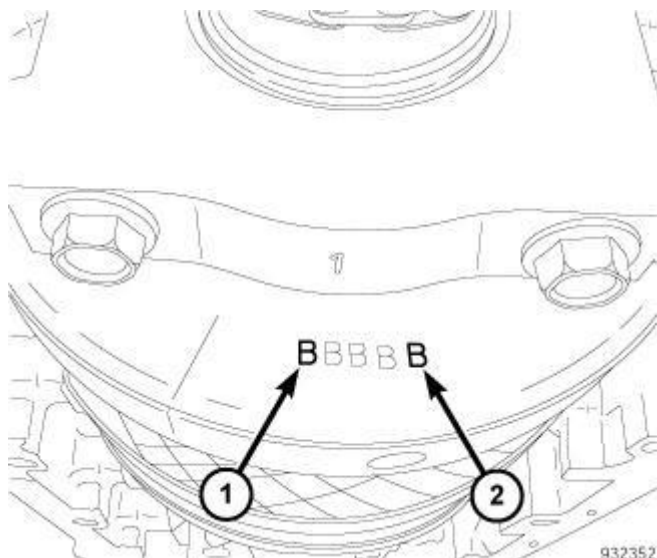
Crankshaft Counterweight Stamped Grade Identification Marks
